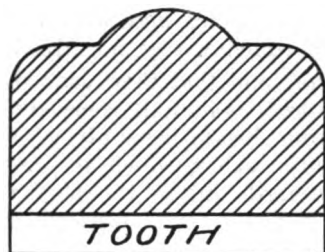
CROSS-SECTION VIEW OF TOOTH
